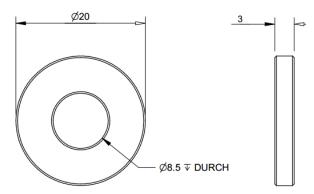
Dimensions of Spacer (ADEC Part. # 70109)
